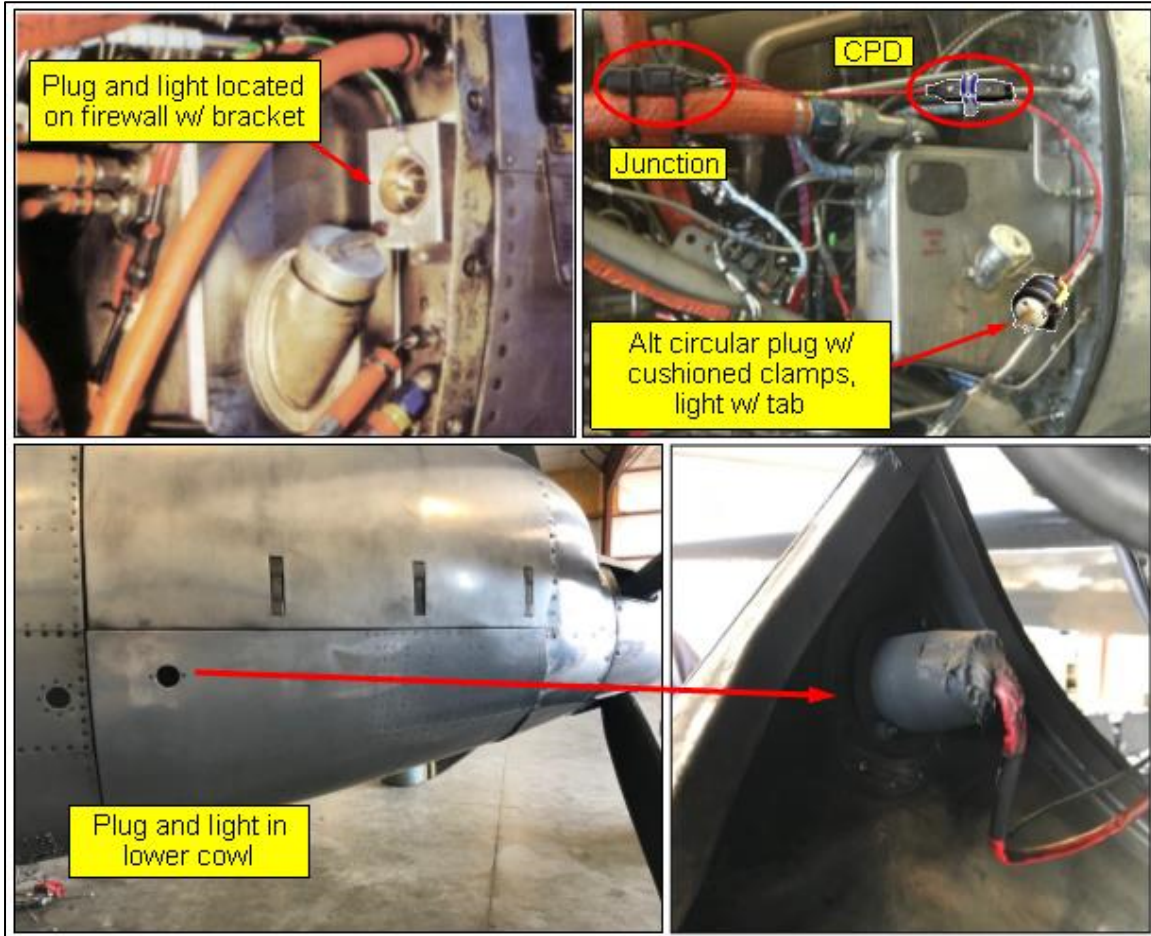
Example of -10 down inlet engine (CASA 212, Conquest and others).
